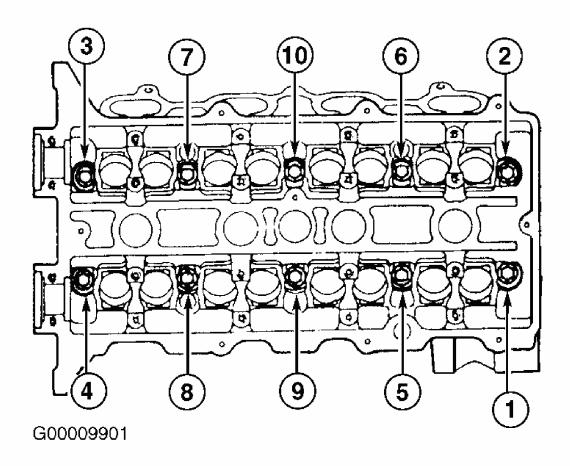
Cylinder Head Bolt Loosening Sequence Courtesy of MAZDA MOTOR CORP.
